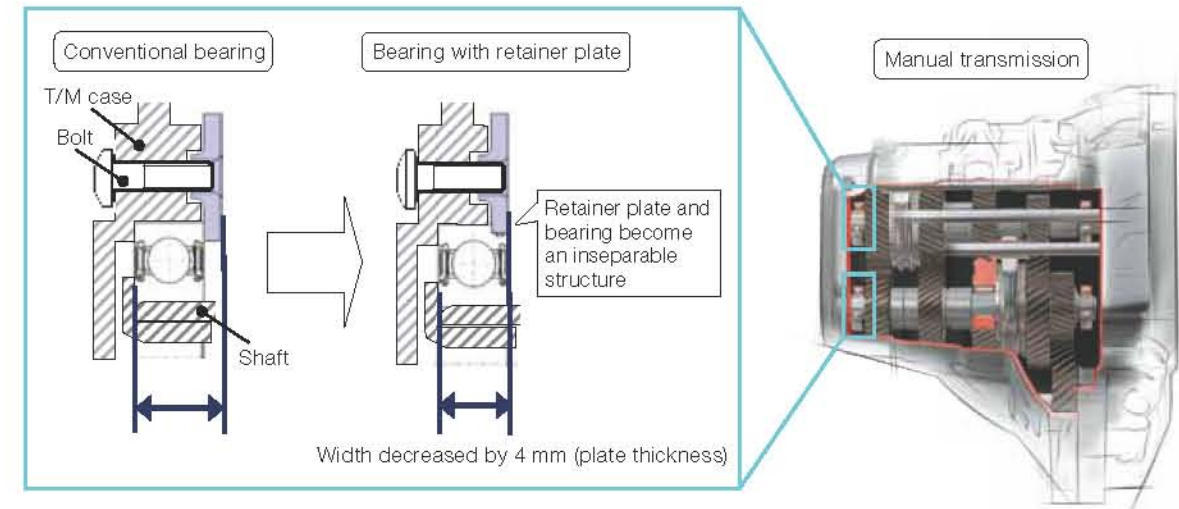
Features of the newly developed deep groove ball bearing with retainer plate
